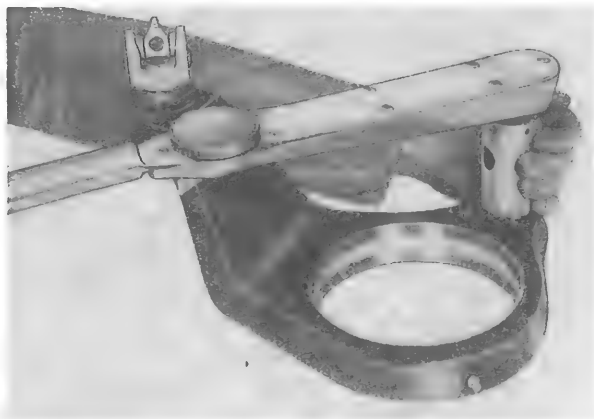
Tightening Lock Nut on Lock Assembly of Horn
